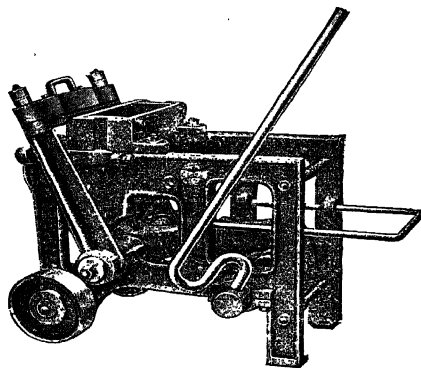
A hand re-press. (Courtesy of International Clay Machinery Company.)
